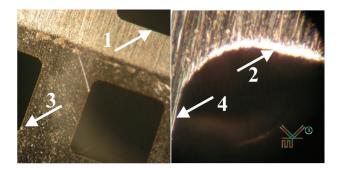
Surface of a laser cut stencil after mechanical processing: 1
